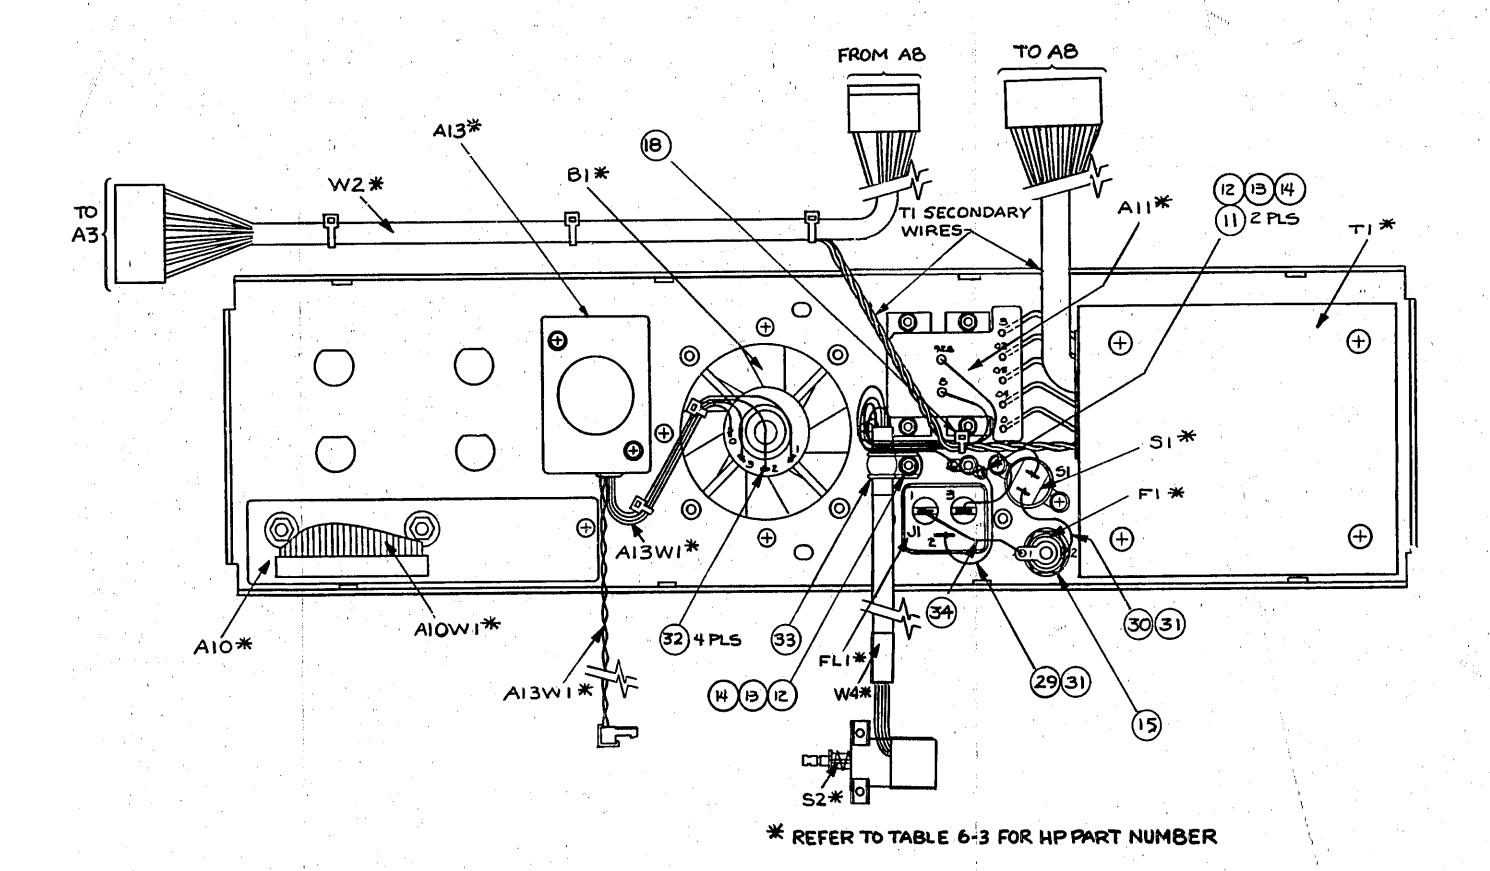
Rear Panel, Parts Locations (2 of 2) 6-29/6-30
